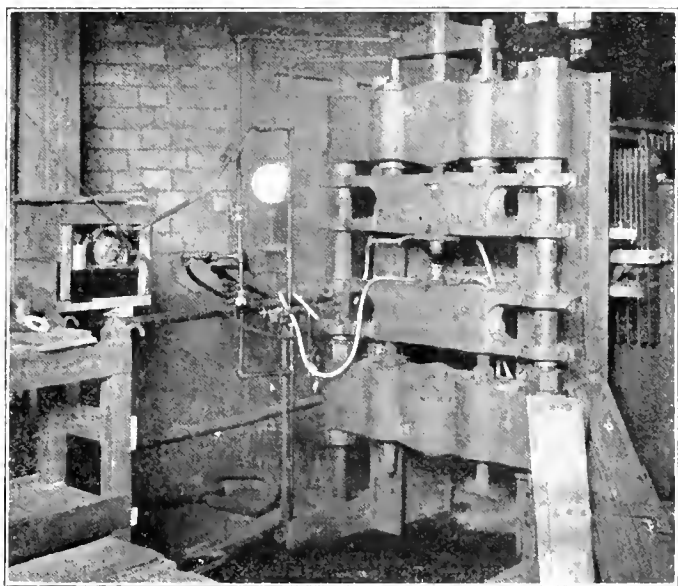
SPOT-WELDING MACHINE MADE BY GENERAL ELECTRIC CO. CURRENT CAPACITY, 100,000 AMPERES; PRESSURE, 36 TONS
